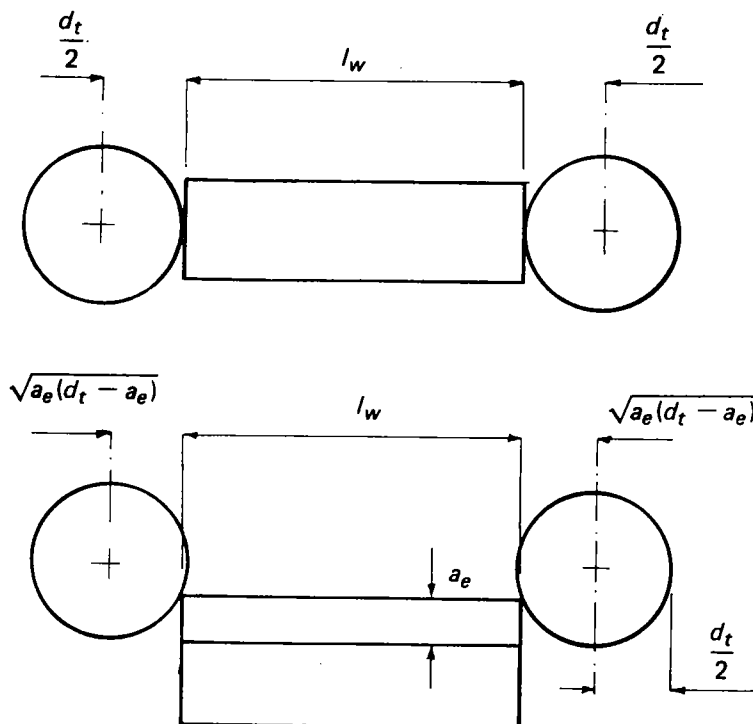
Relative motion between the face-milling cutter and the workpiece during machining time.
